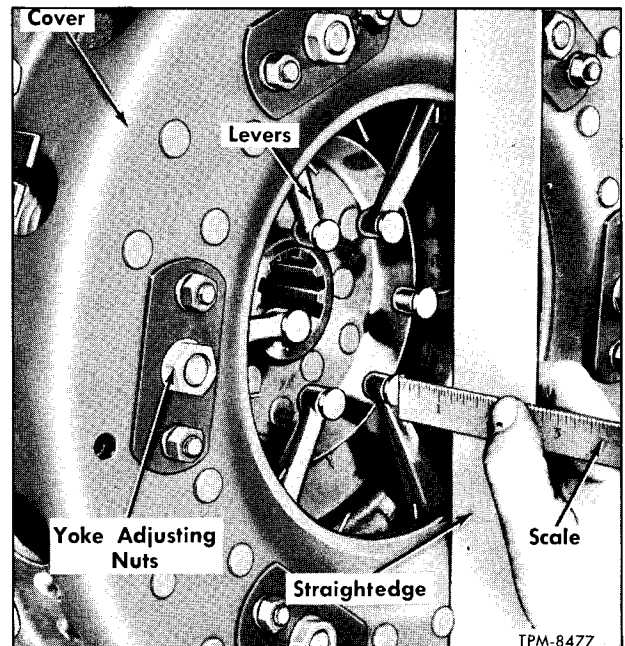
Checking Release Lever Button Position With Scale and Straightedge
